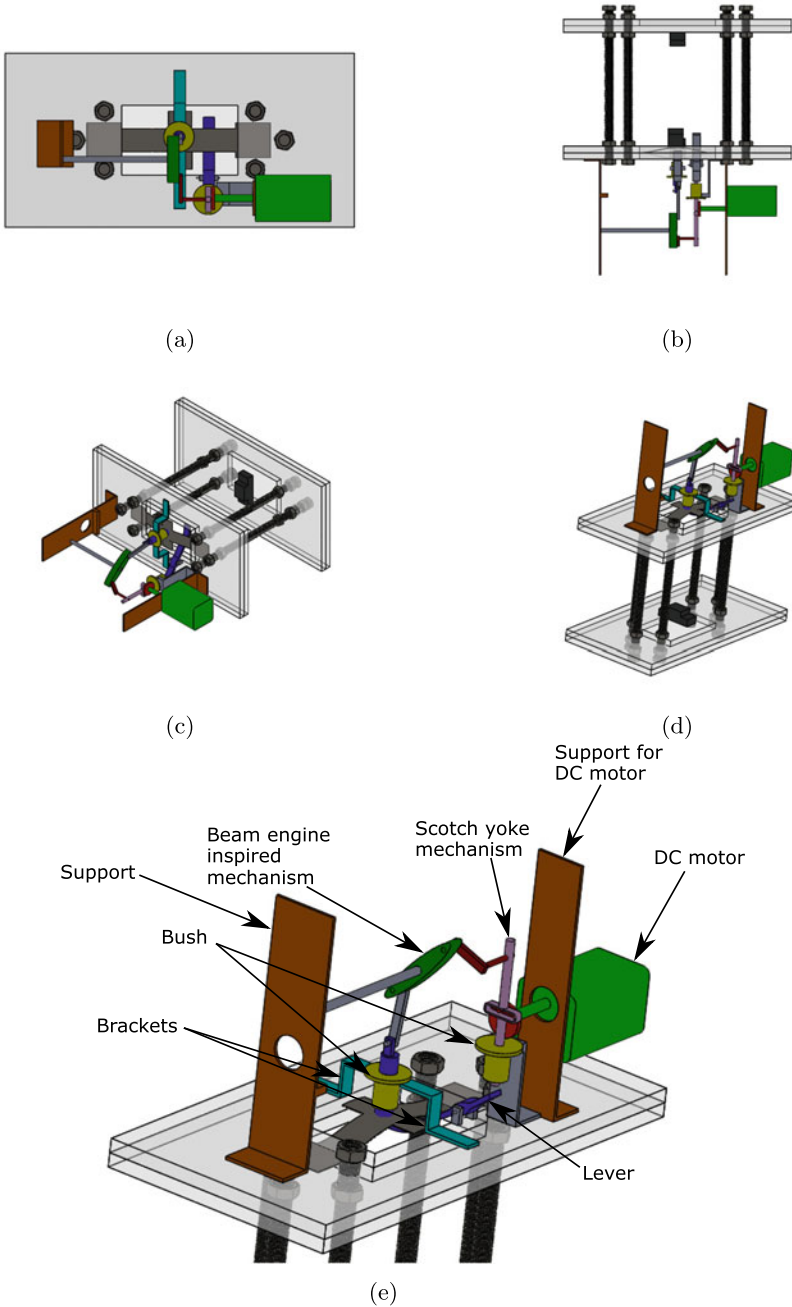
a Front view, b top view, c isometric view and d a different view, e close up view of the gripper with the Scotch Yoke cum beam engine inspired actuating mechanism
